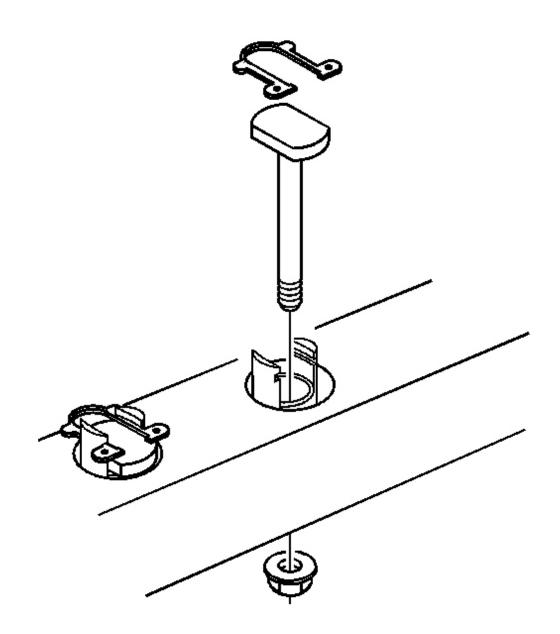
View Of Crossmember Bolt & Spring Clip - Front
